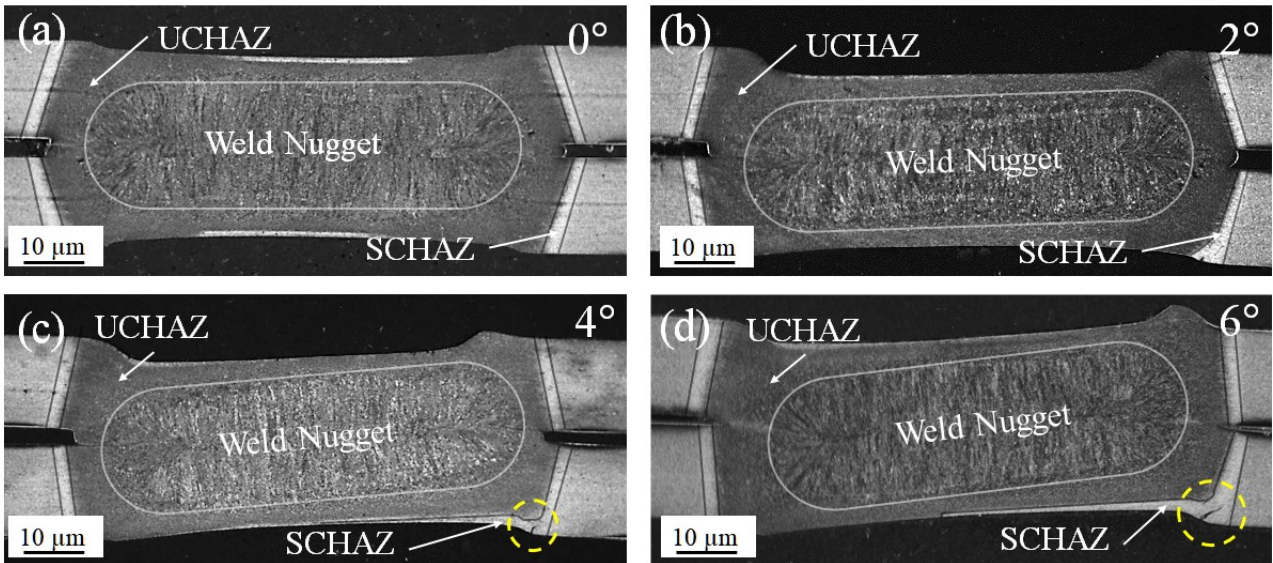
Example cross-sections of the (a) 0° case (b) 2° case (c) 4° case (d) 6° case showing the weld nugget and HAZ shape with large LME cracks highlighted in yellow
